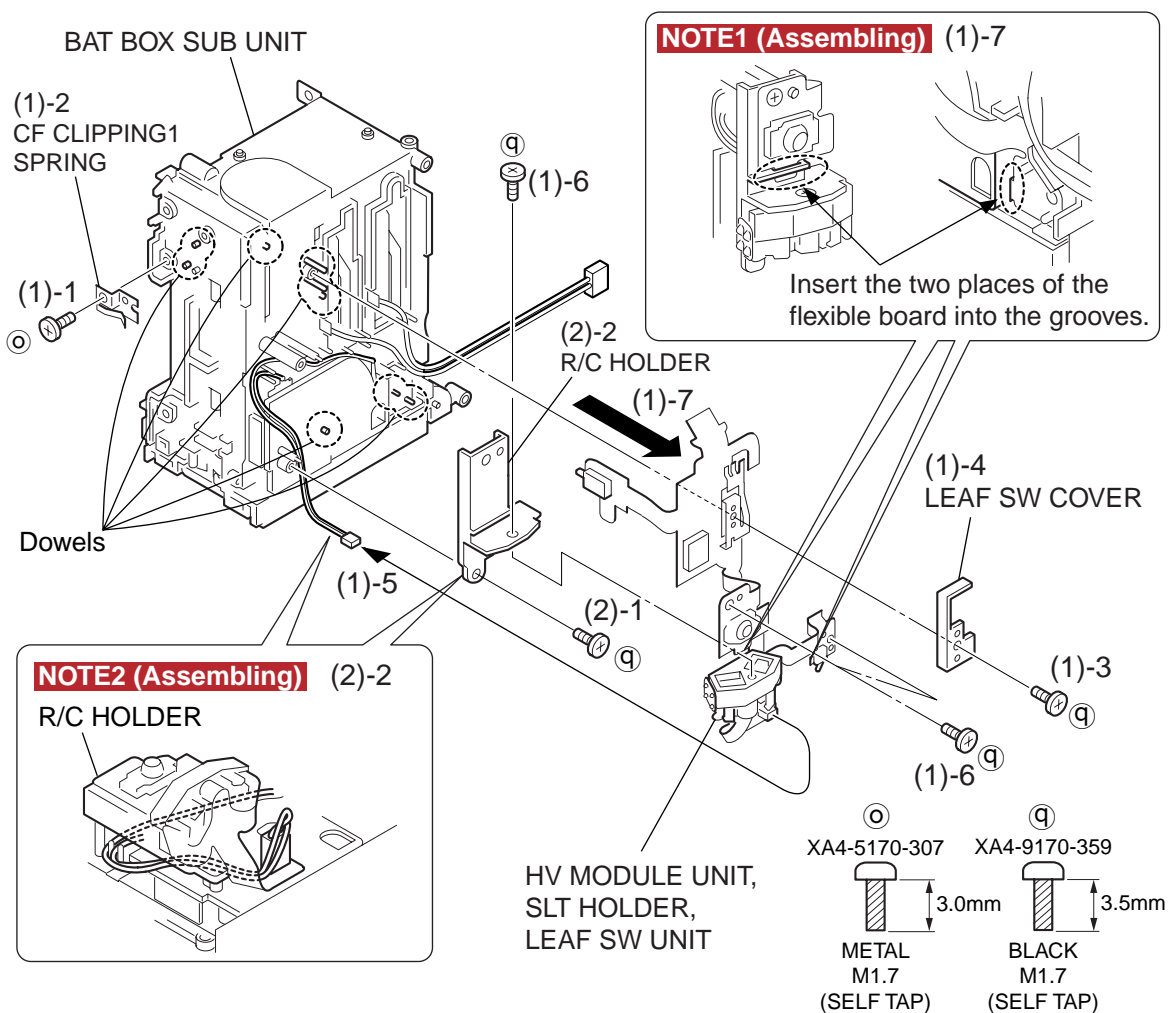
HV MODULE UNIT, SLT HOLDER, LEAF SW UNIT, R/C HOLDER
